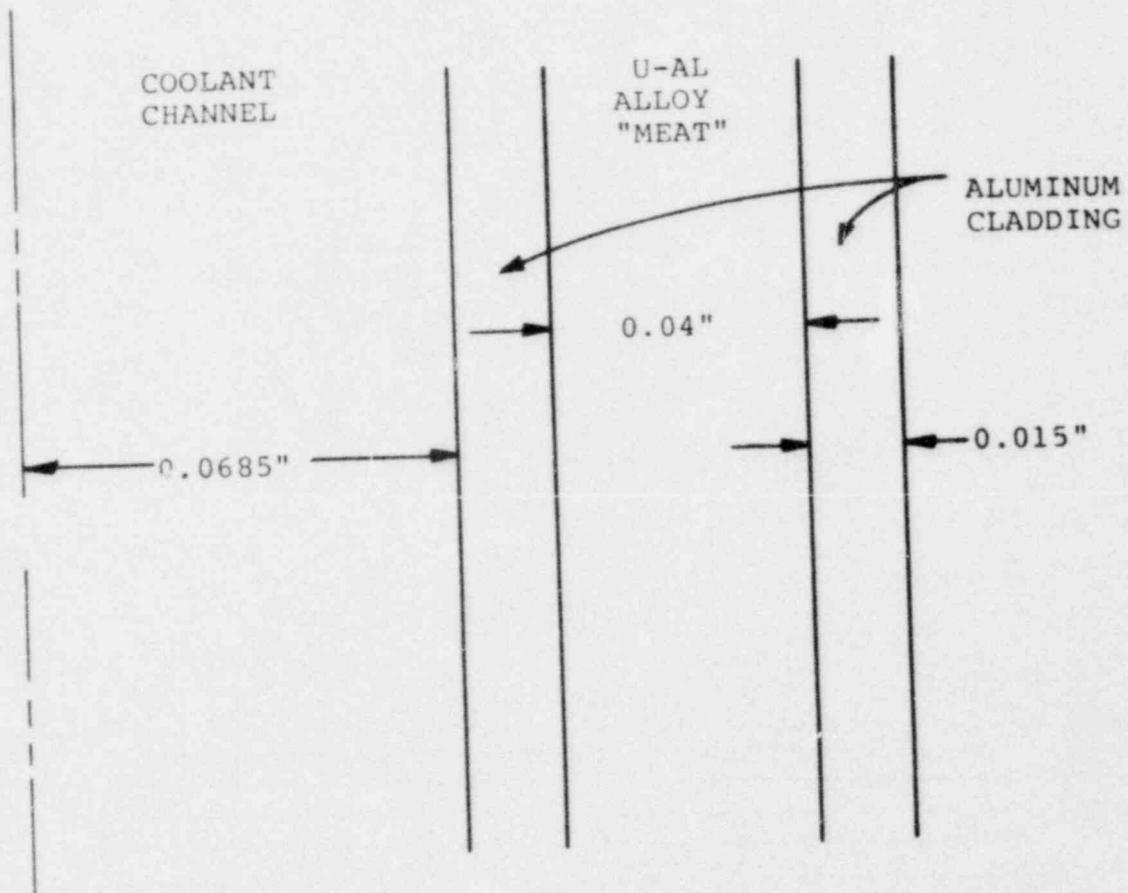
Fuel Plate/Coolant Channel Enlargement Showing UFTR Fuel Cell Arrangement Detail.
